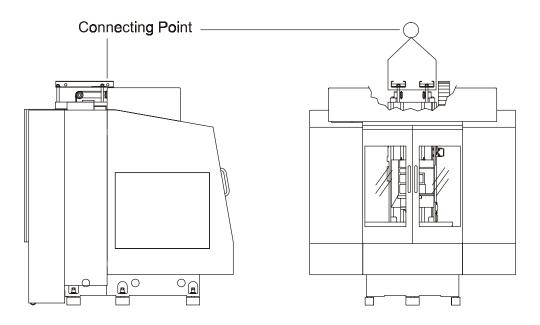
3. Lifting a VMX Series Machine with Crane
